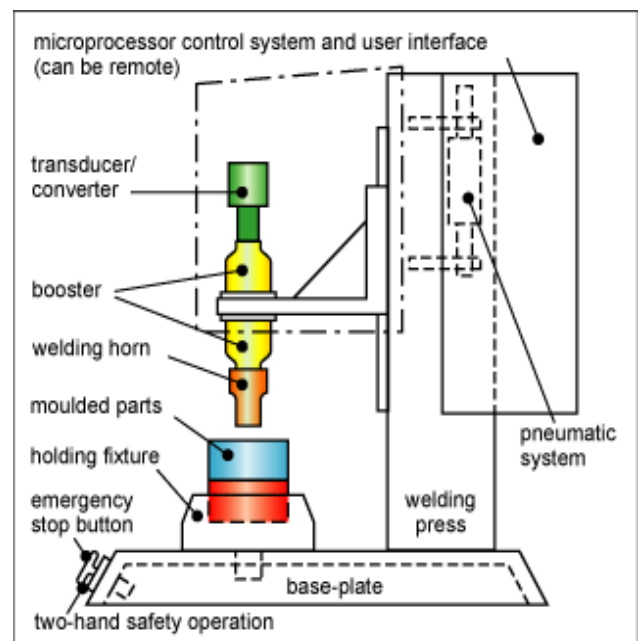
Ultrasonic Welding Schematic Diagram
